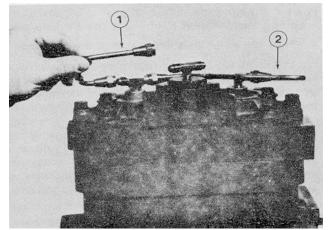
B-1. Remove Air Lines 5. Remove the valve assembly retainers and unl3ader caps from both cylinders, Figure 1 2B-2.
